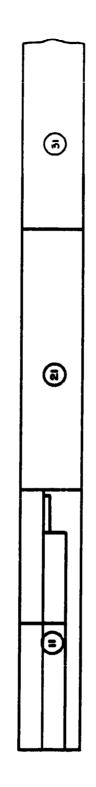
PATTERN FOR SHEARING SPECIMEN BLANKS FROM 4" × 96" SHEET FOR 301 STAINLESS STEEL
